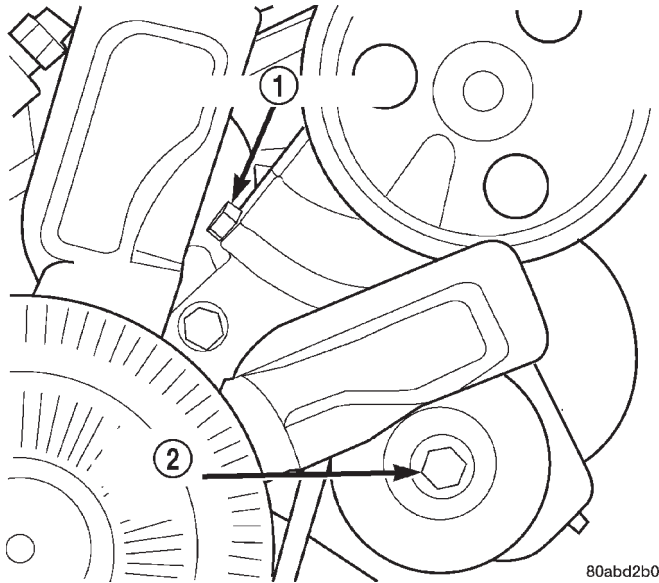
Power Steering Pump Bracket and Idler Pulley
